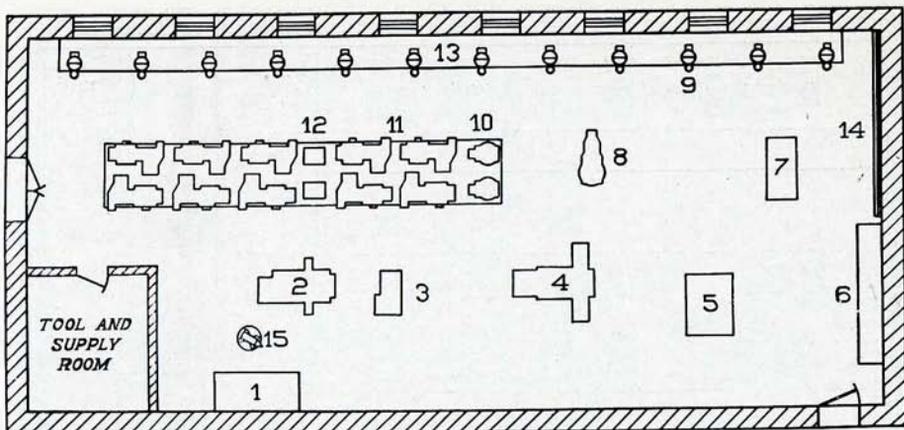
Junior High School Machine Shop with groups of machines on one bench
